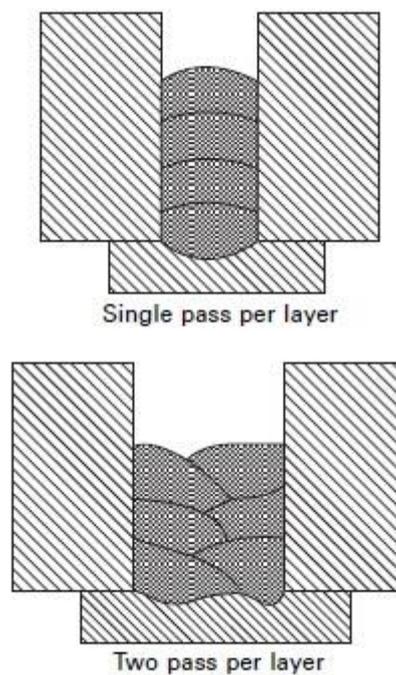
Weld bead placement (Norrish, 2006, p. 172)
